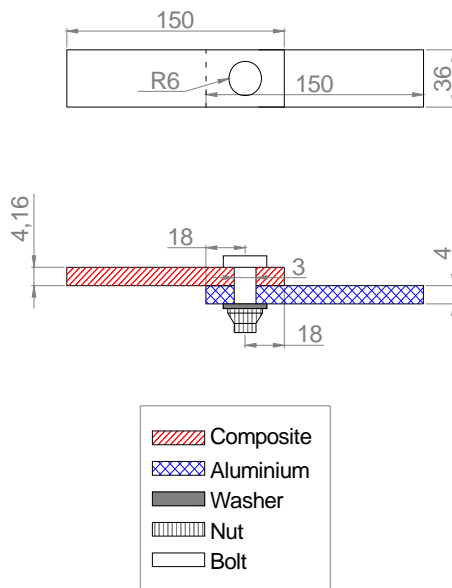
Specimen with protruding head bolt (measures in mm; drawing not scaled)
